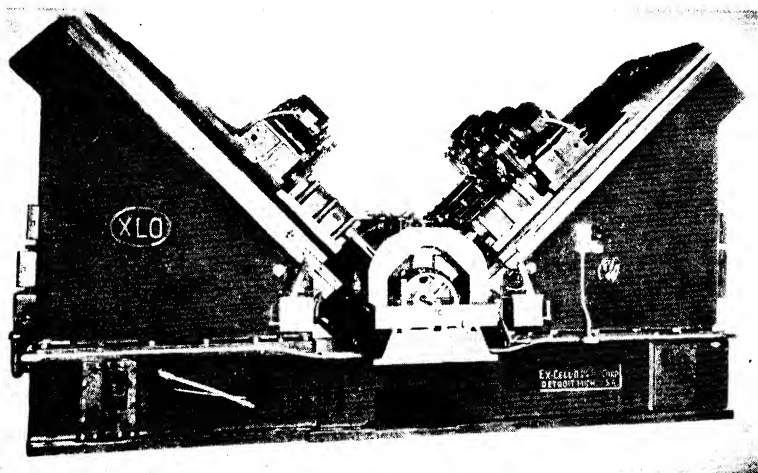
Large single-point machine finishing eight cylinder bores at once.
